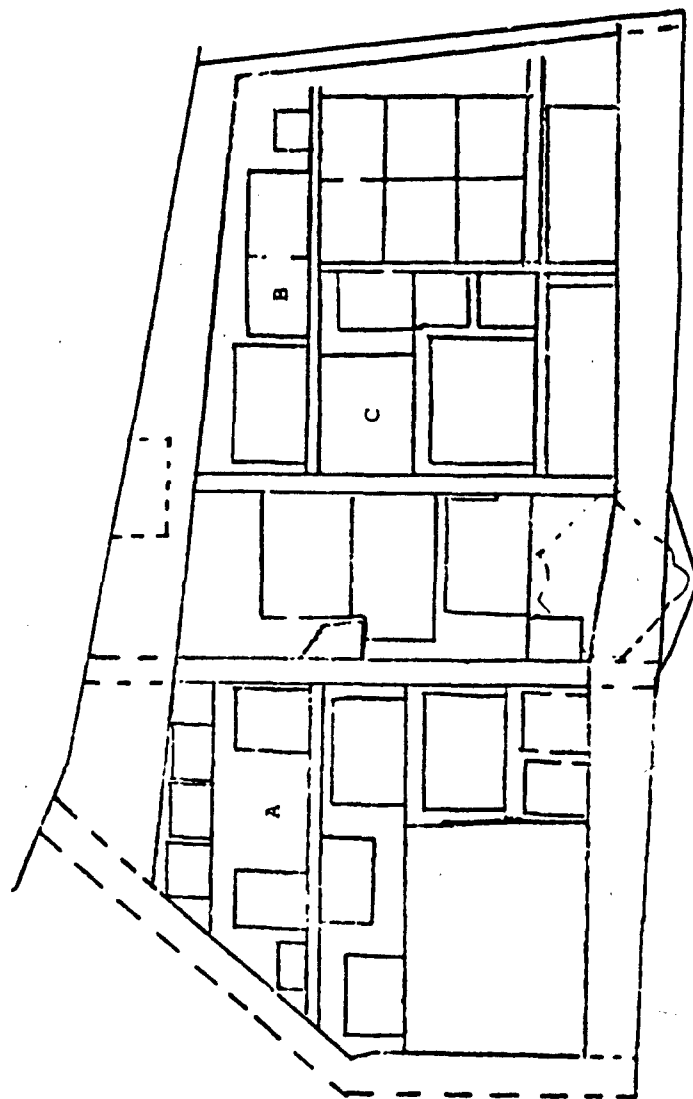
F-111A FORWARD RIGHT-HAND EQUIPMENT BAY SPACE LOCATIONS
